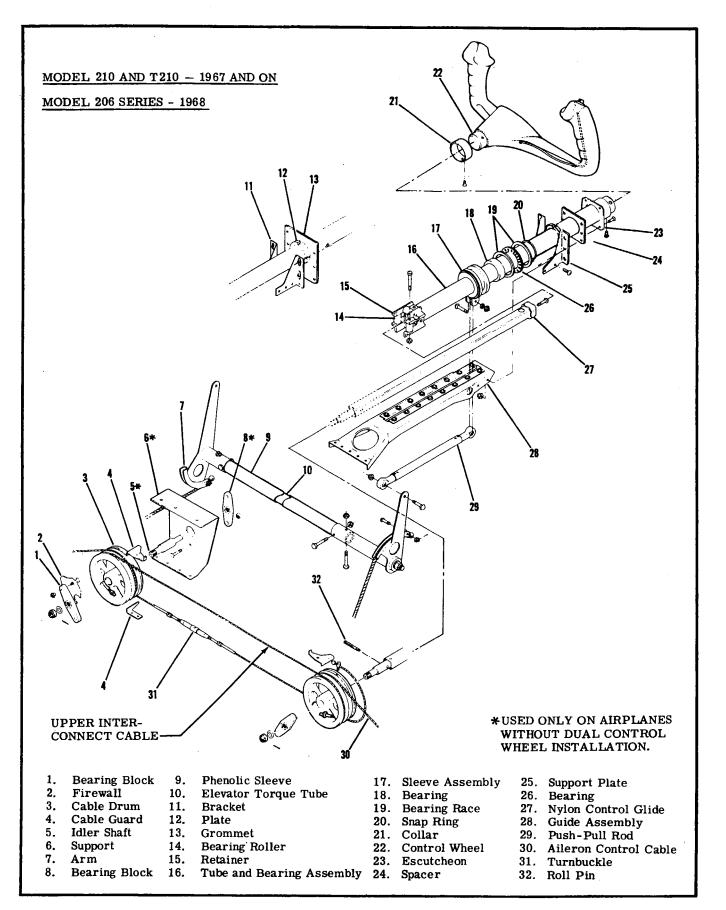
Aileron Control System (Sheet 3 of 3)
